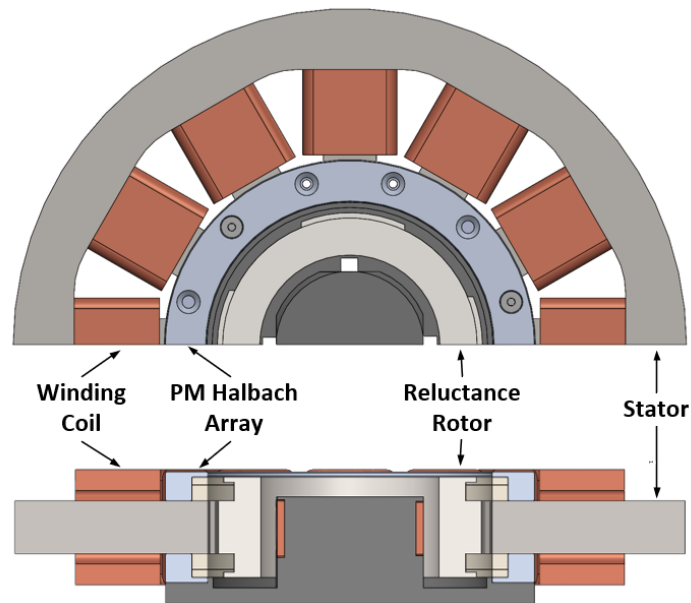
Prototype homopolar bearingless motor cross-section.
